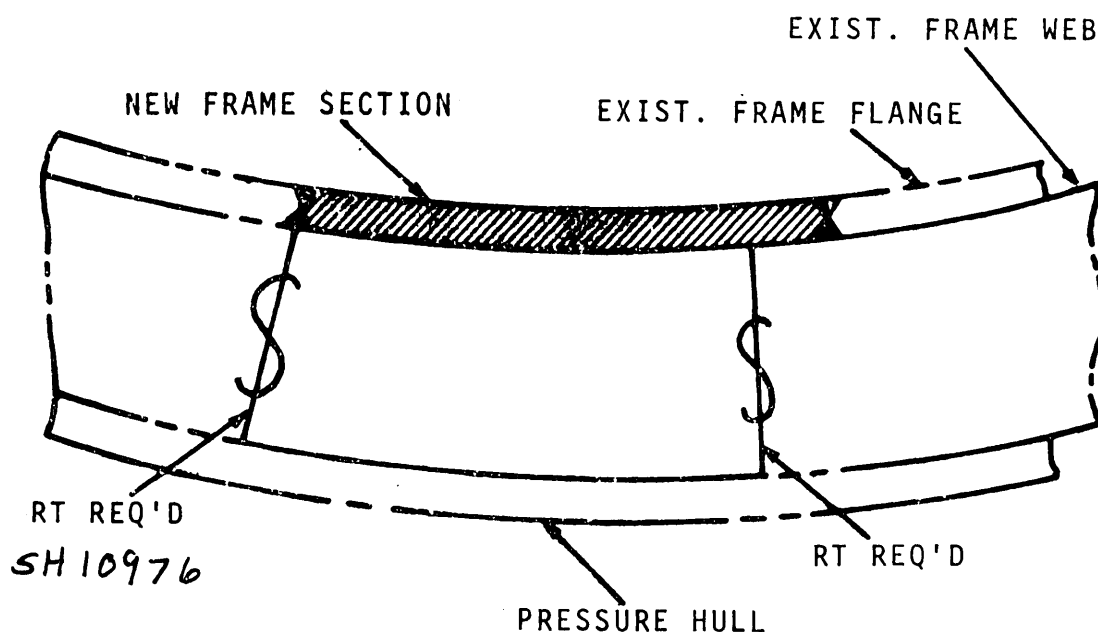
Frame web butt welds, requiring RT, which are part of access and closure assemblies.
